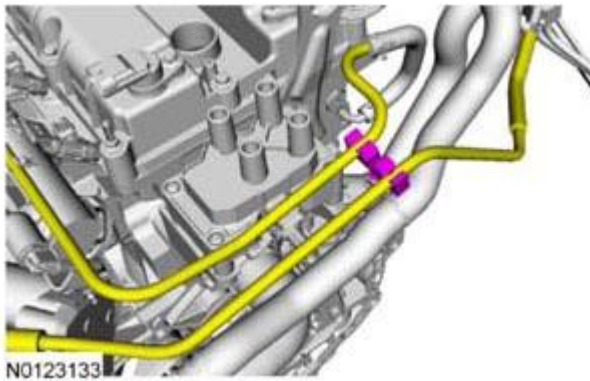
Identifying EVAP Tube And Coolant Tube To Coolant Outlet Bracket Retainer
